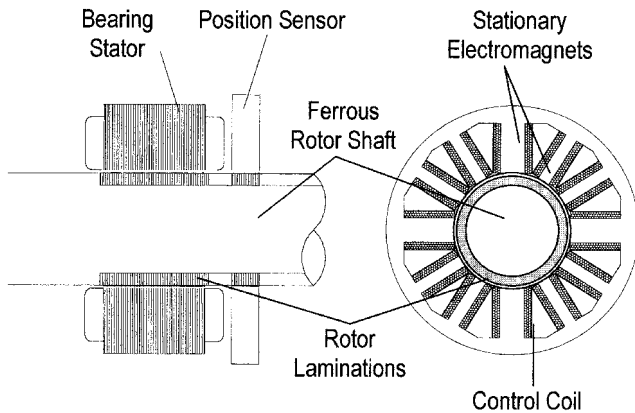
Typical radial electromagnetic bearing. (Axial thrust bearings have the stator coils arranged in a disk configuration, a ferrous rotating disk being supported in the resulting magnetic circuit.)
